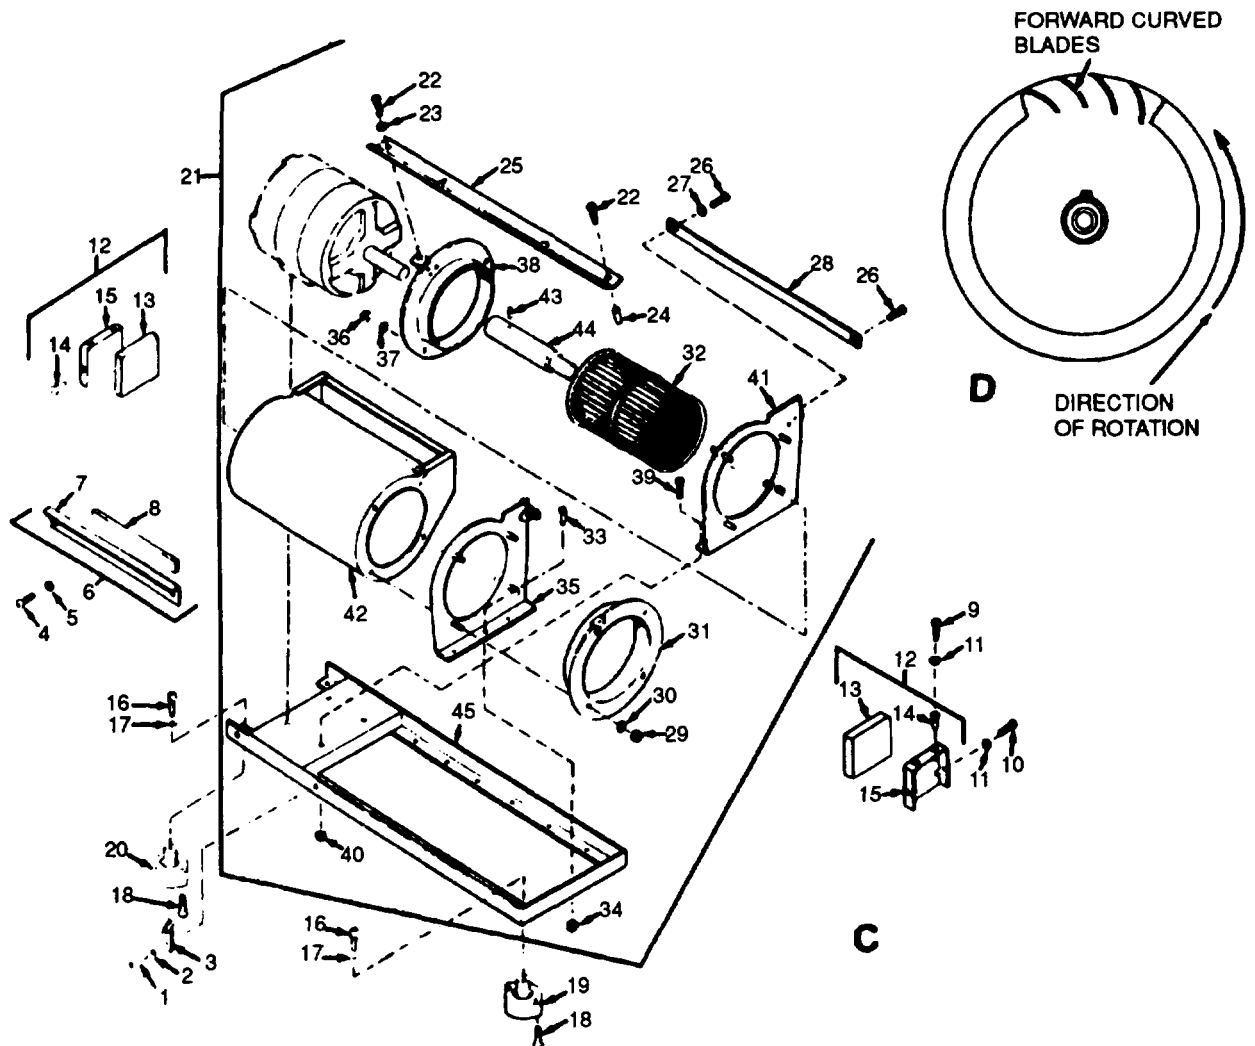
Evaporator Blower and Motor (Sheet 2 of 3)
